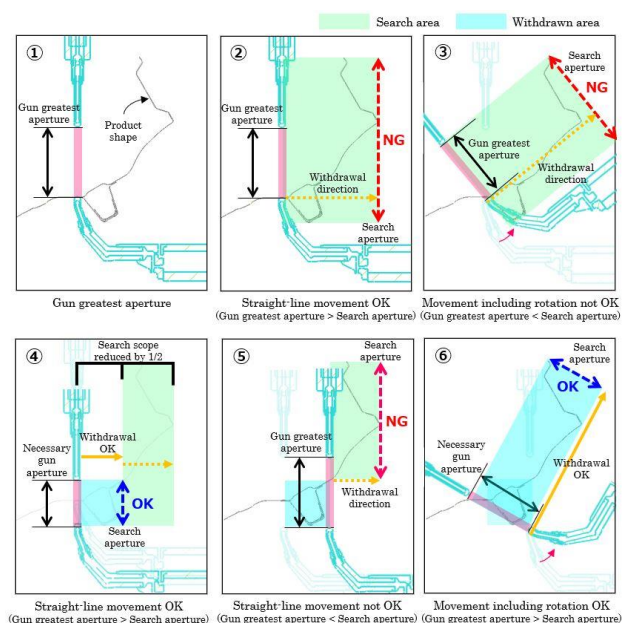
Welding GUN insertion / removal automatic judgment (2-minute method)
